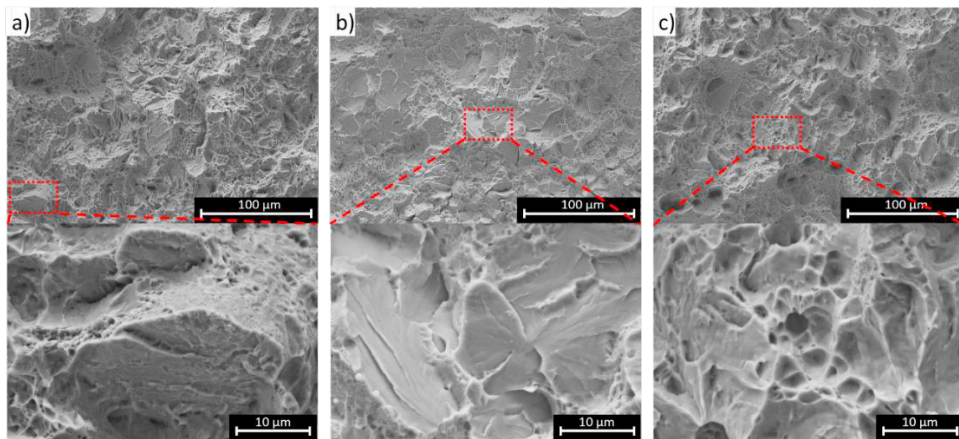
Fracture surfaces of B38 sample at positions: a) 25 mm; b) 60 mm; c) 85 mm.
